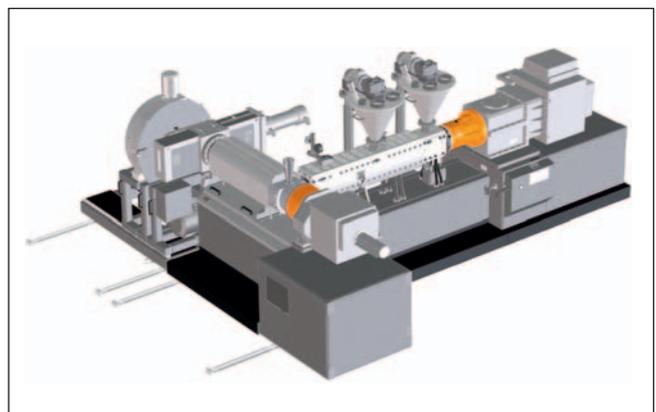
Major parts of the high-performance MX Kneader Series: motor-gearbox unit, processing section with feed locations, directly flange-mounted single-flight discharge screw with melt filtration and pelletizing
